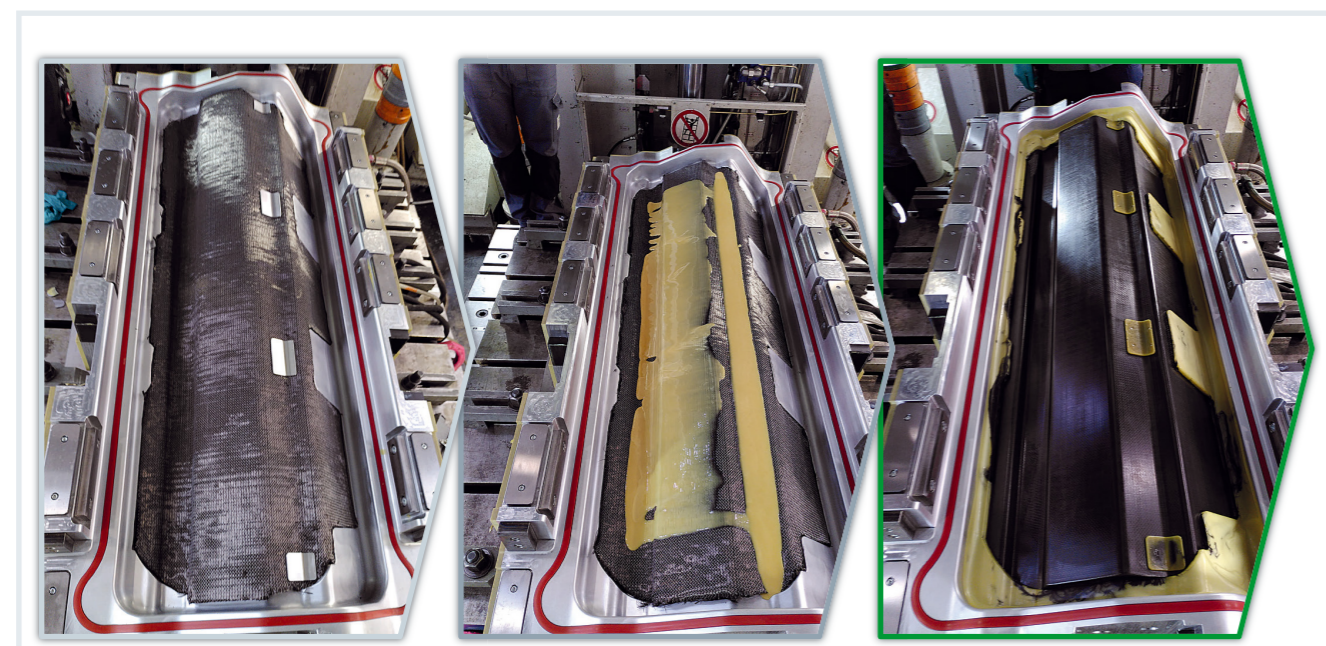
Manufacturing steps for the inner seat shell: Carbon fiber fabric in the mold, resin poured onto the fabric, cured inner seat shell (from left to right). © Fraunhofer ICT
